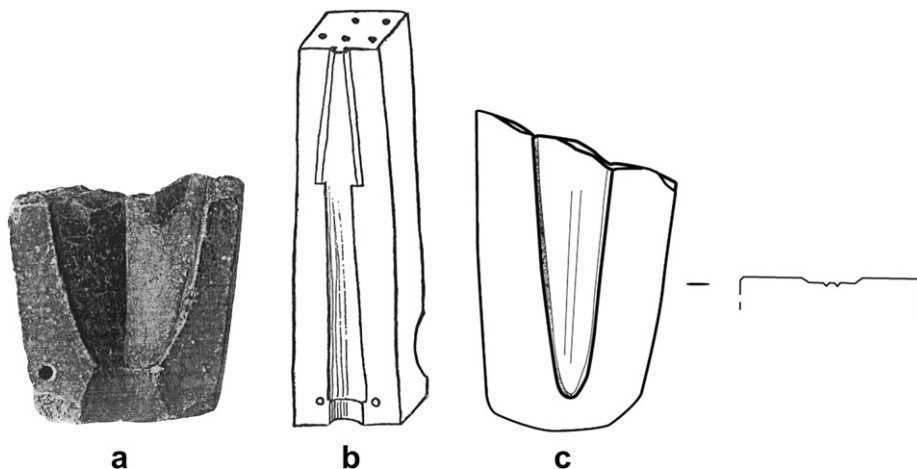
Middle Bronze Age weapon moulds: (a) duckbill axe mould from Byblos showing the sprue and the blade pattern cavity (Dunand, 1939, n° 3069, p. 198, Atlas 1937, Pl. CVIII); (b) mould of a small socketed spearhead (Dunand, 1939, n° 6558, p.425, fig. 312); and (c) mould showing the blade pattern cavity of possibly a double-ribbed dagger (Dunand, 1954: 224, illustration by Gernez, 2007, ill. 180).
